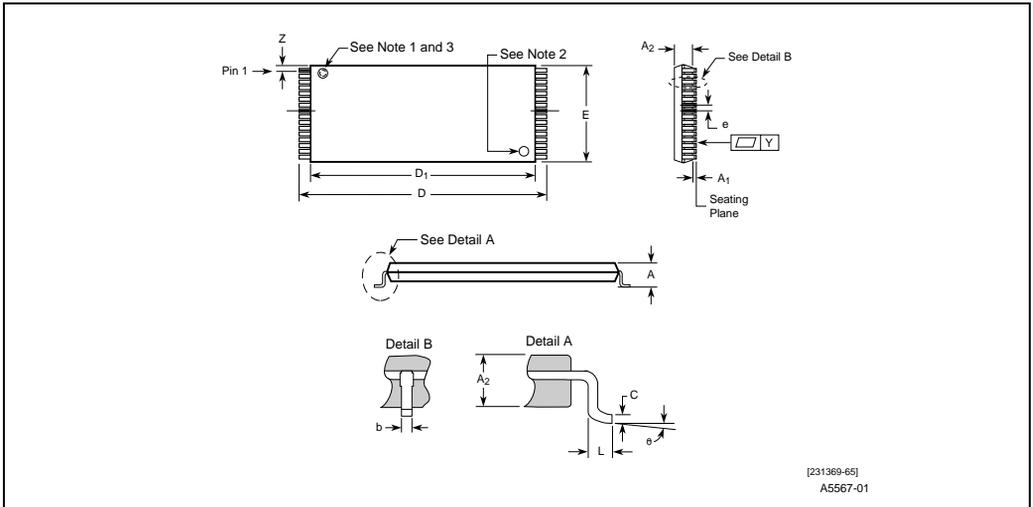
32-Lead TSOP Package Drawing and Specifications
